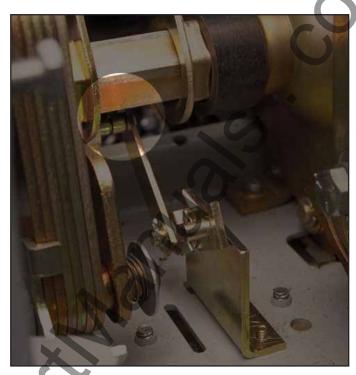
Reset Pivot Assembly Arm Attached to the Breaker Trip Bar Pin.
